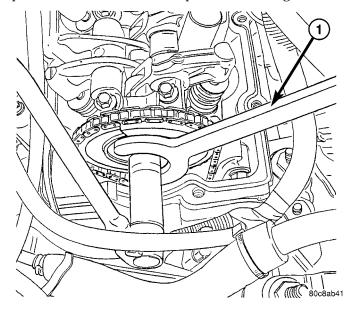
Special Tool 8435 - Camshaft Sprocket Holding Wrench
